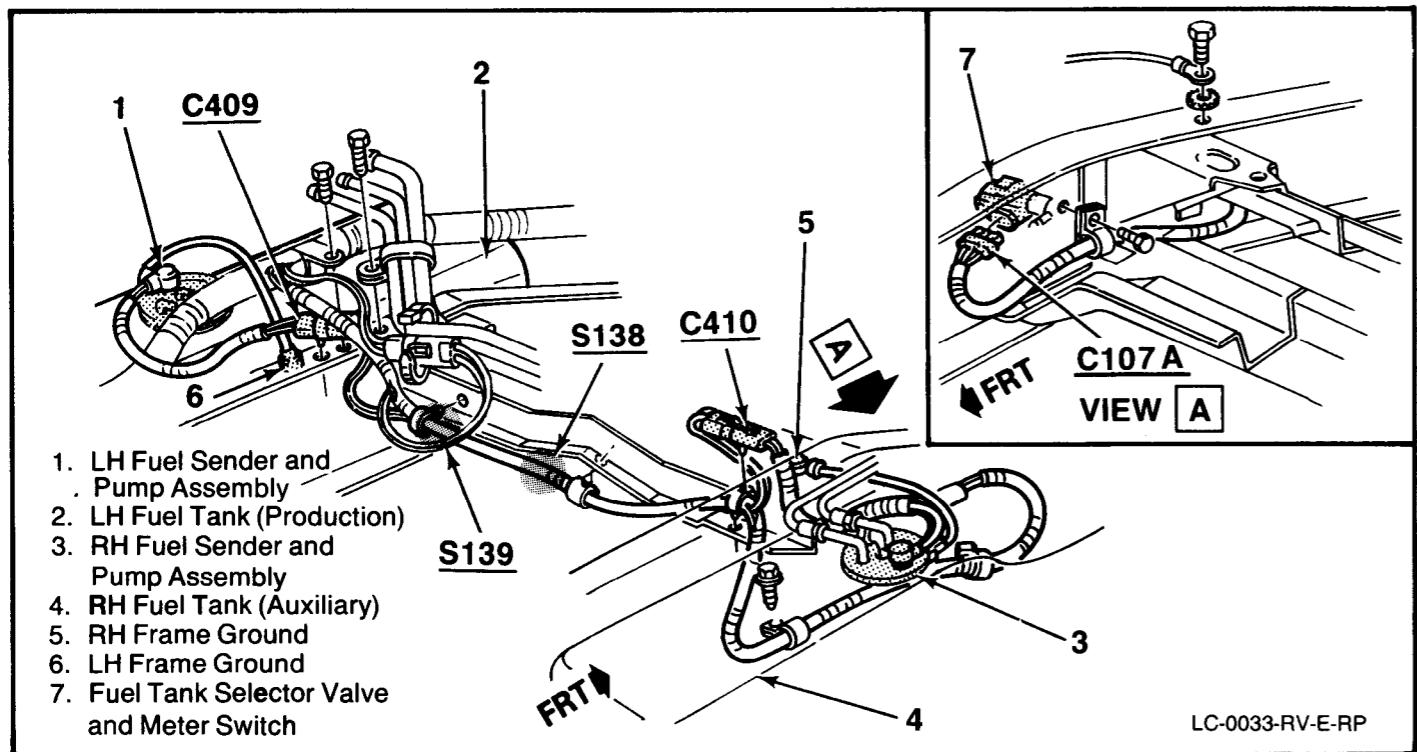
Auxiliary Fuel Tanks — Gasoline
